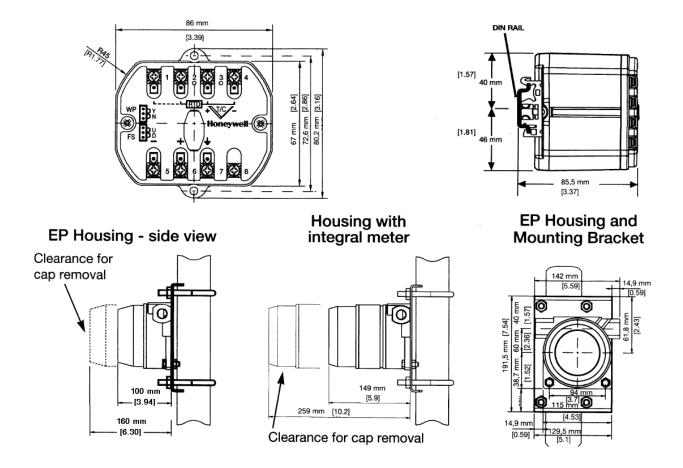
STT350 Transmitter and Optional Flameproof Housing Dimensions -reference only - mm (inches)
